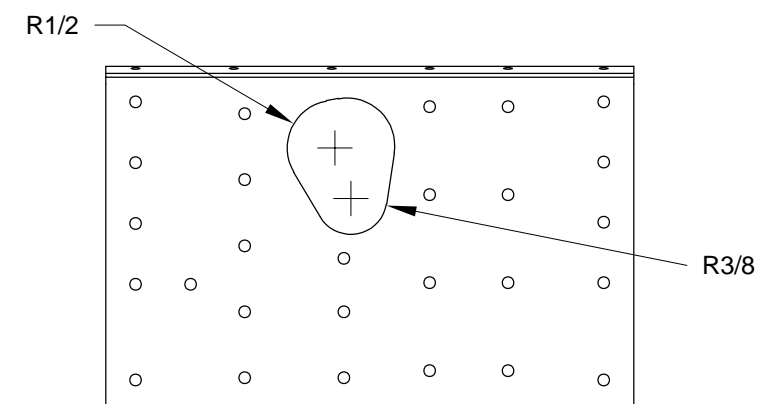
COPYING THE AILERON PUSHROD HOLE INTO W-1007D-L OUTBOARD REAR SPAR DOUBLER
